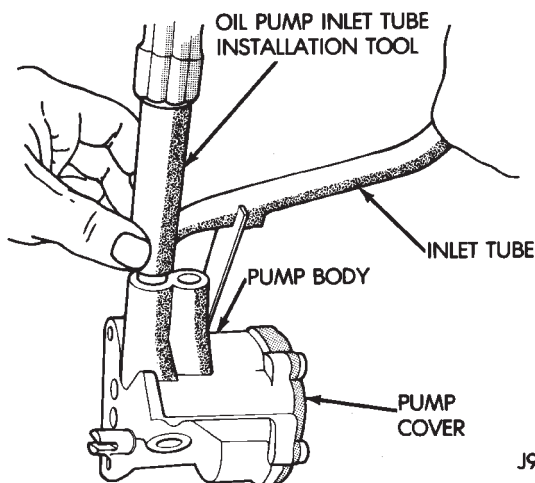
Inlet Tube Installation Tool 7624 (J-21882)
